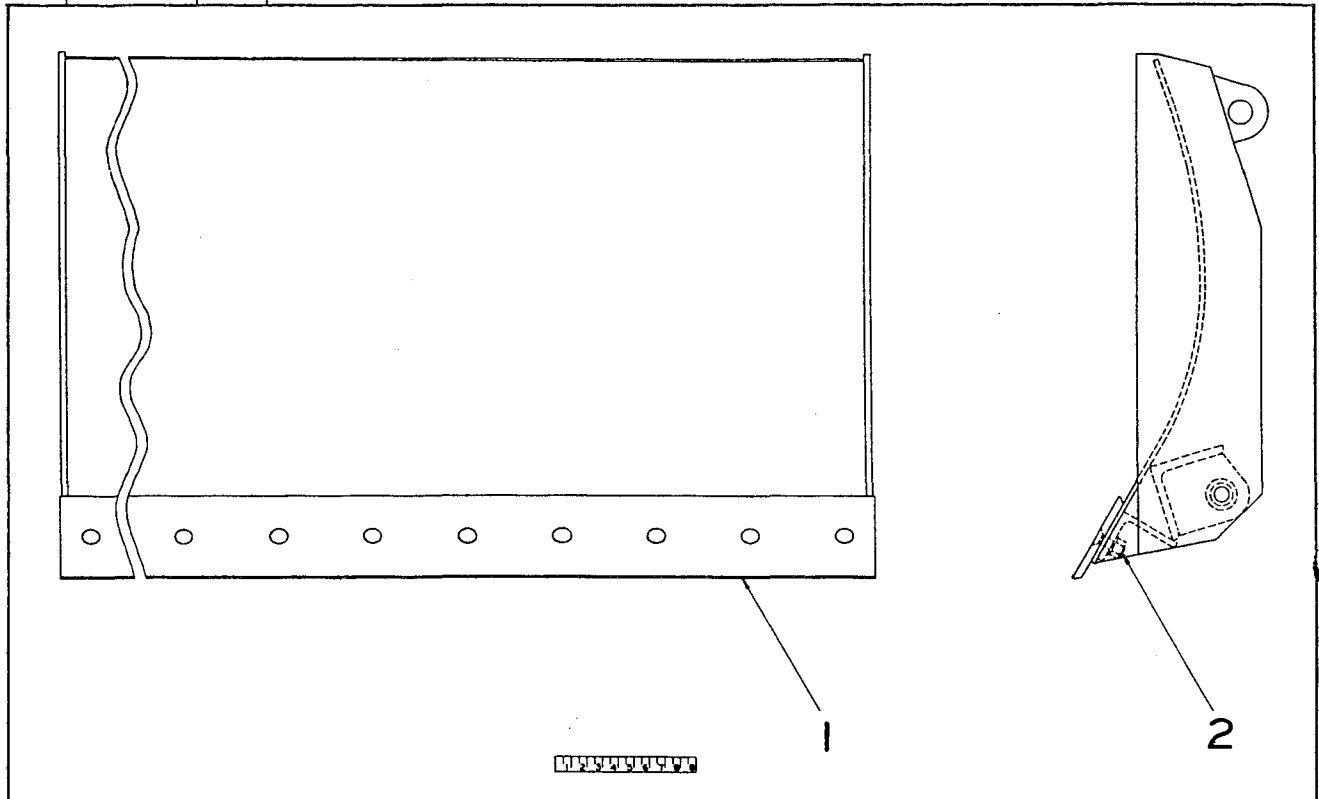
BULLDOZER MOLDBOARD ASSEMBLY
